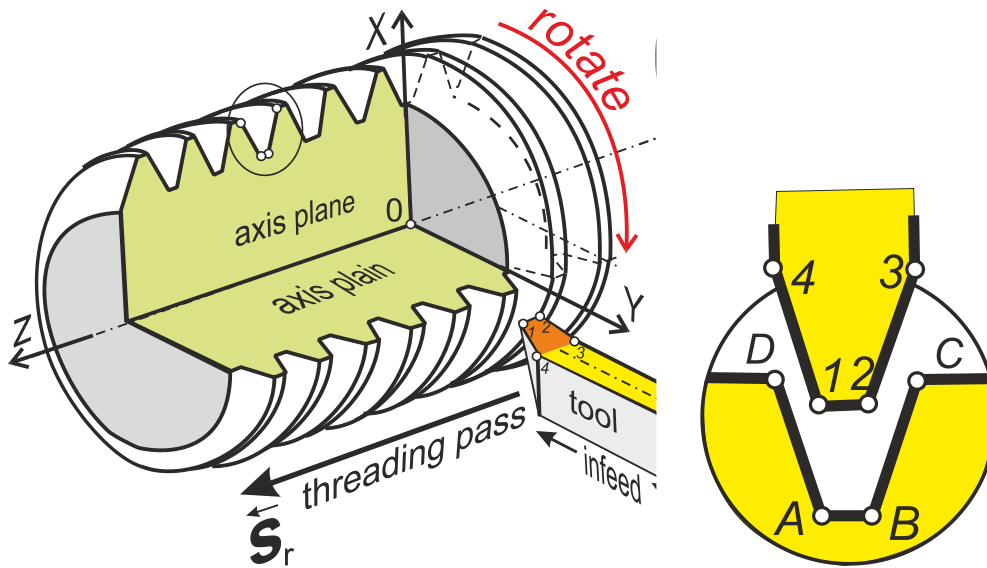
Shema of the turning of screw by using cutter with non-zero rake angle.
